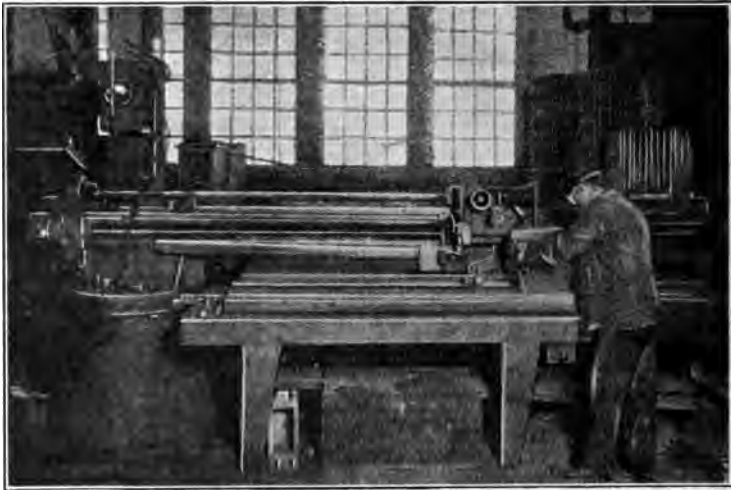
MACHINE OPERATOR WELDING SEAMS 116 INCHES LONG IN CORRUGATED SHEETS FOR TRANSFORMERS.
